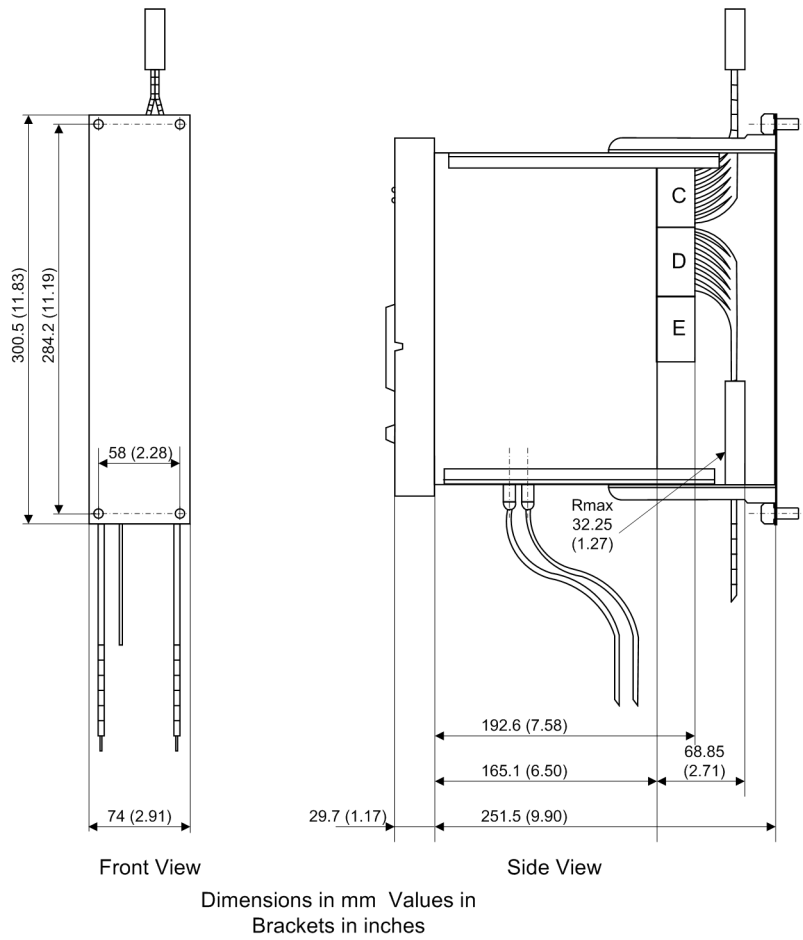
Dimensional drawing of a 7RW80 for panel flush mounting (housing size 1/6)
